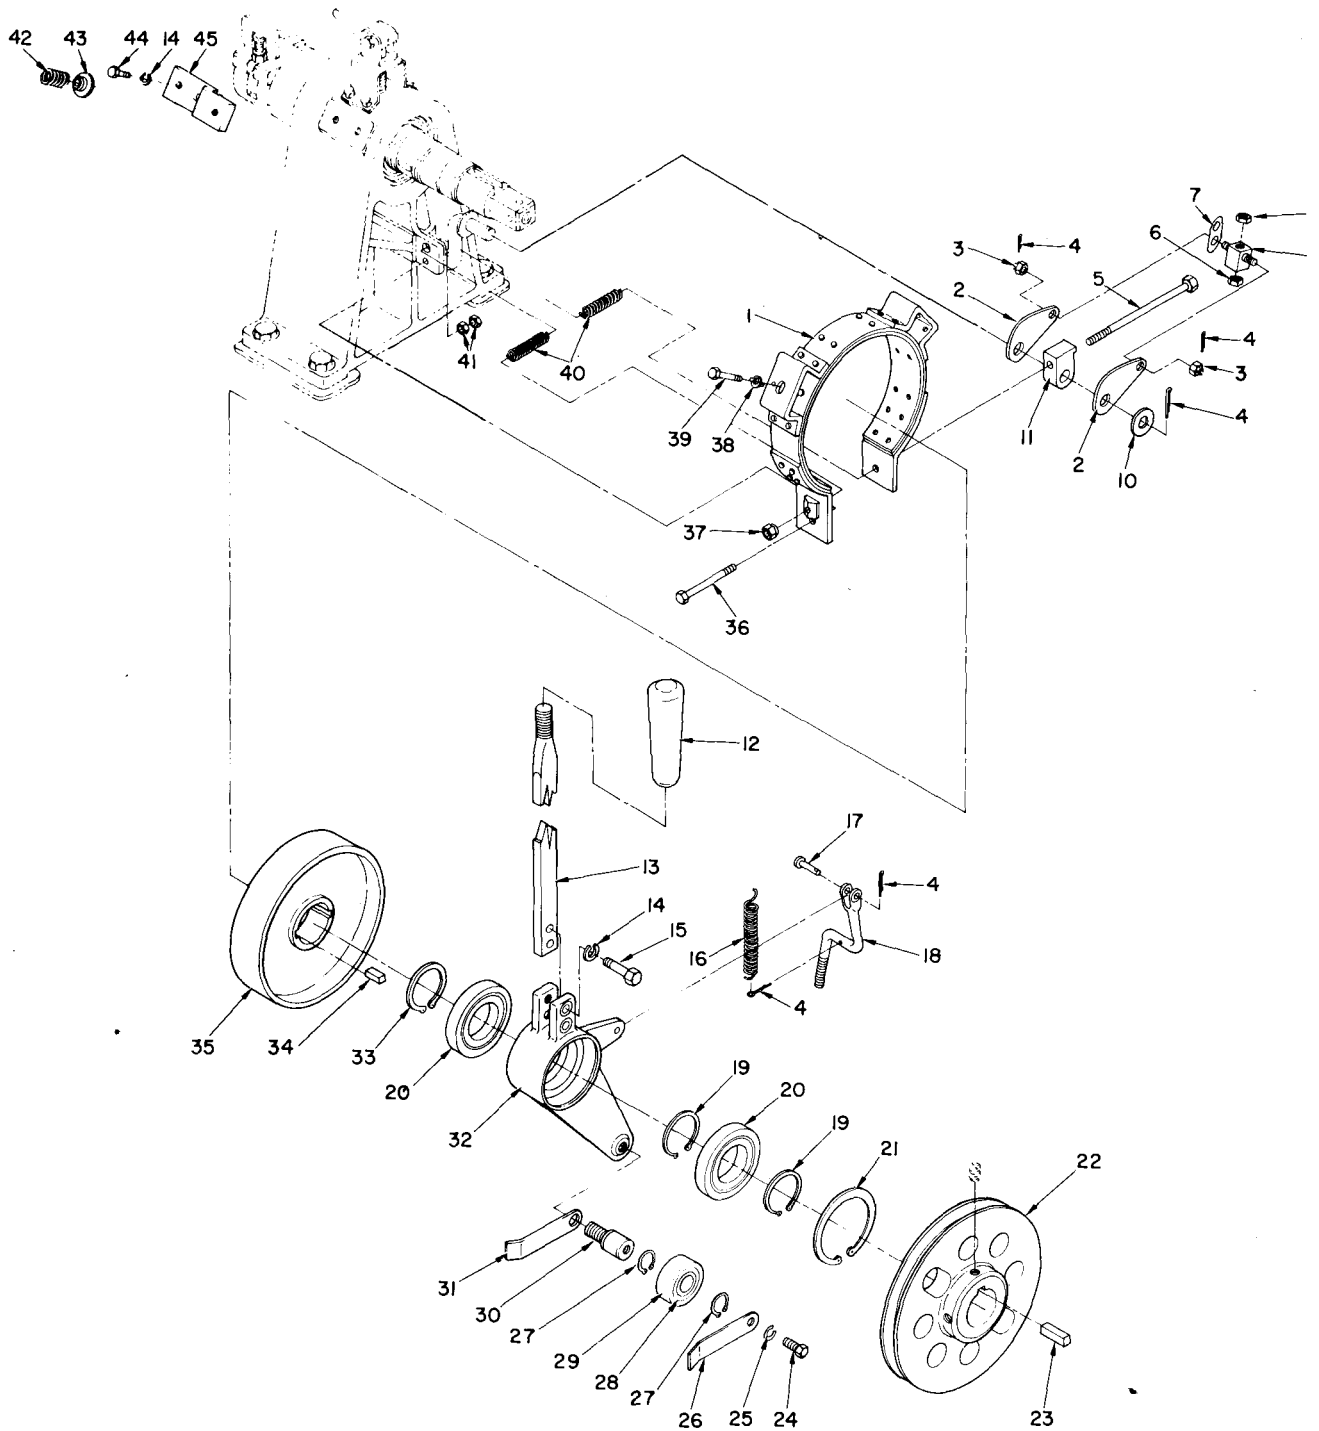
Clutch and Brake Assembly 1A1 (Sheet 1 of 2).
